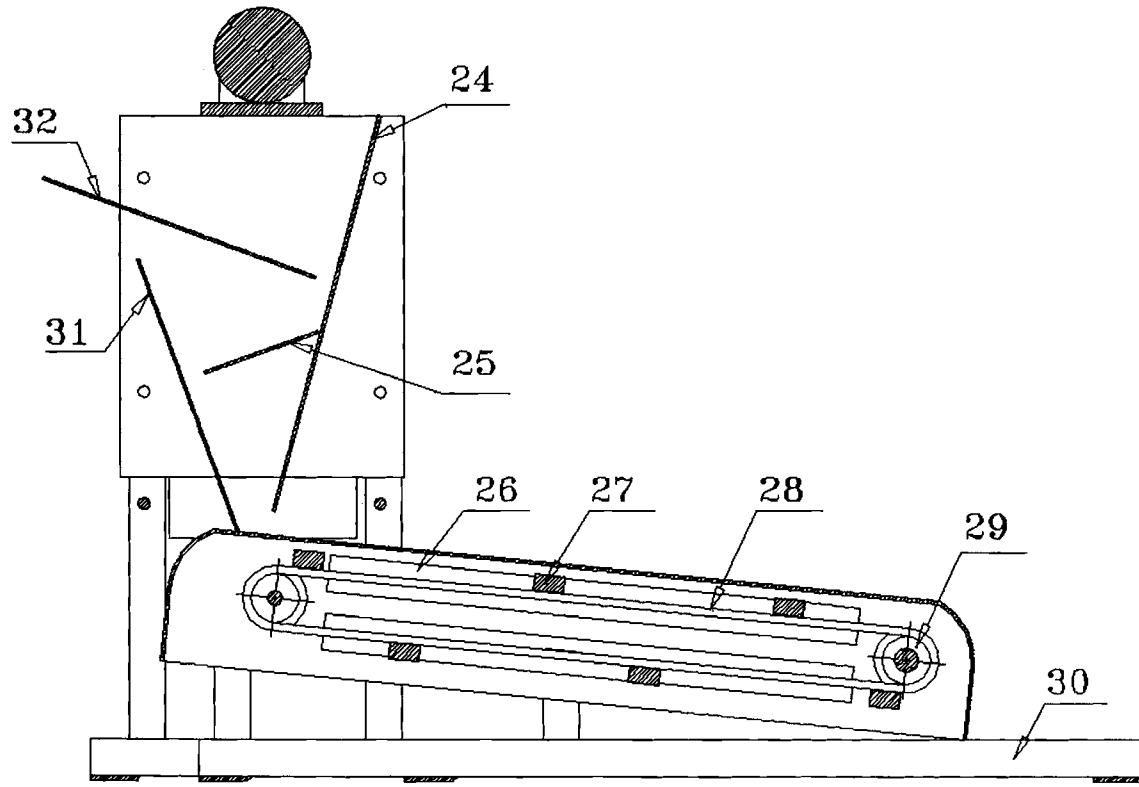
Cross Sectional Side View of Vibrating Hopper-Conveyor Apparatus
